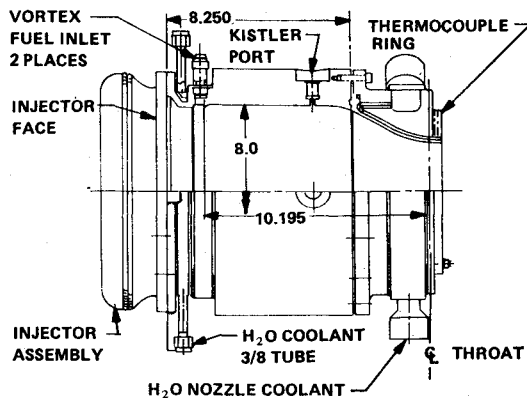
Fuel vortex injector—water-cooled nozzle assembly.
